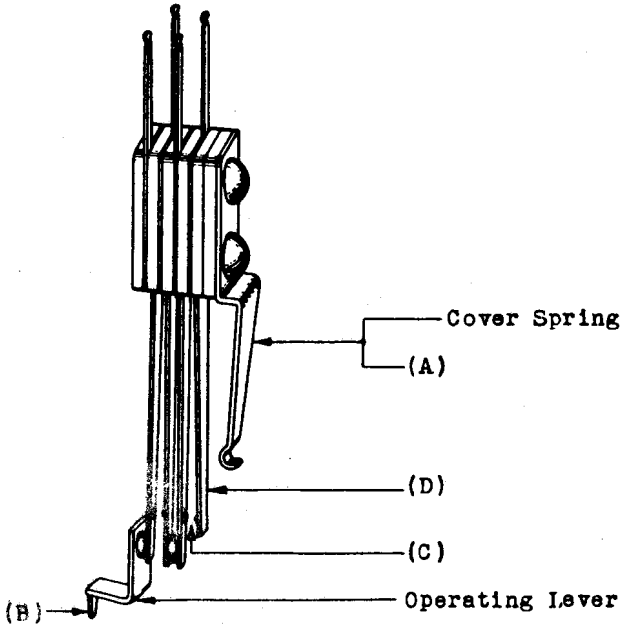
Spring Assembly - Externally Adjusted Dashpot Relay
